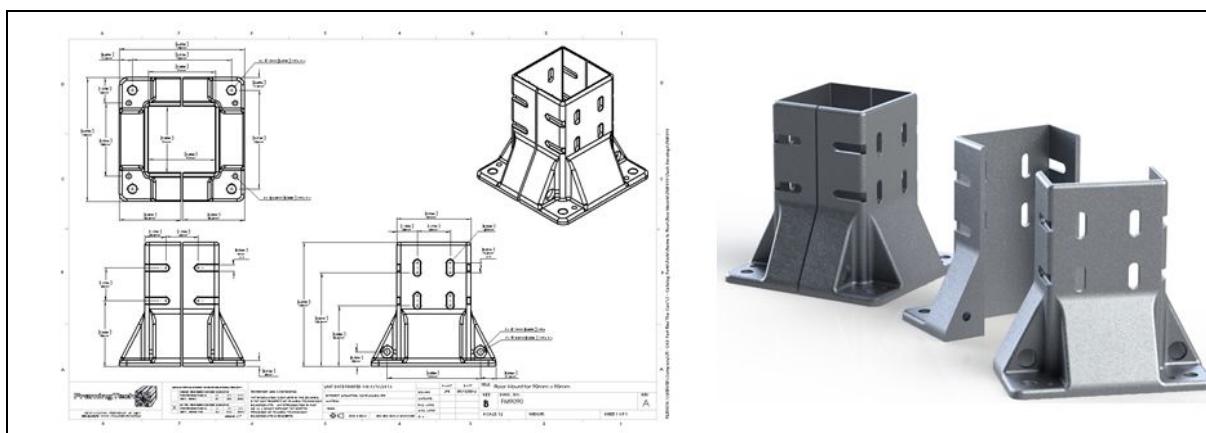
Framing Tech Floor Mount Base P/N FM9090
